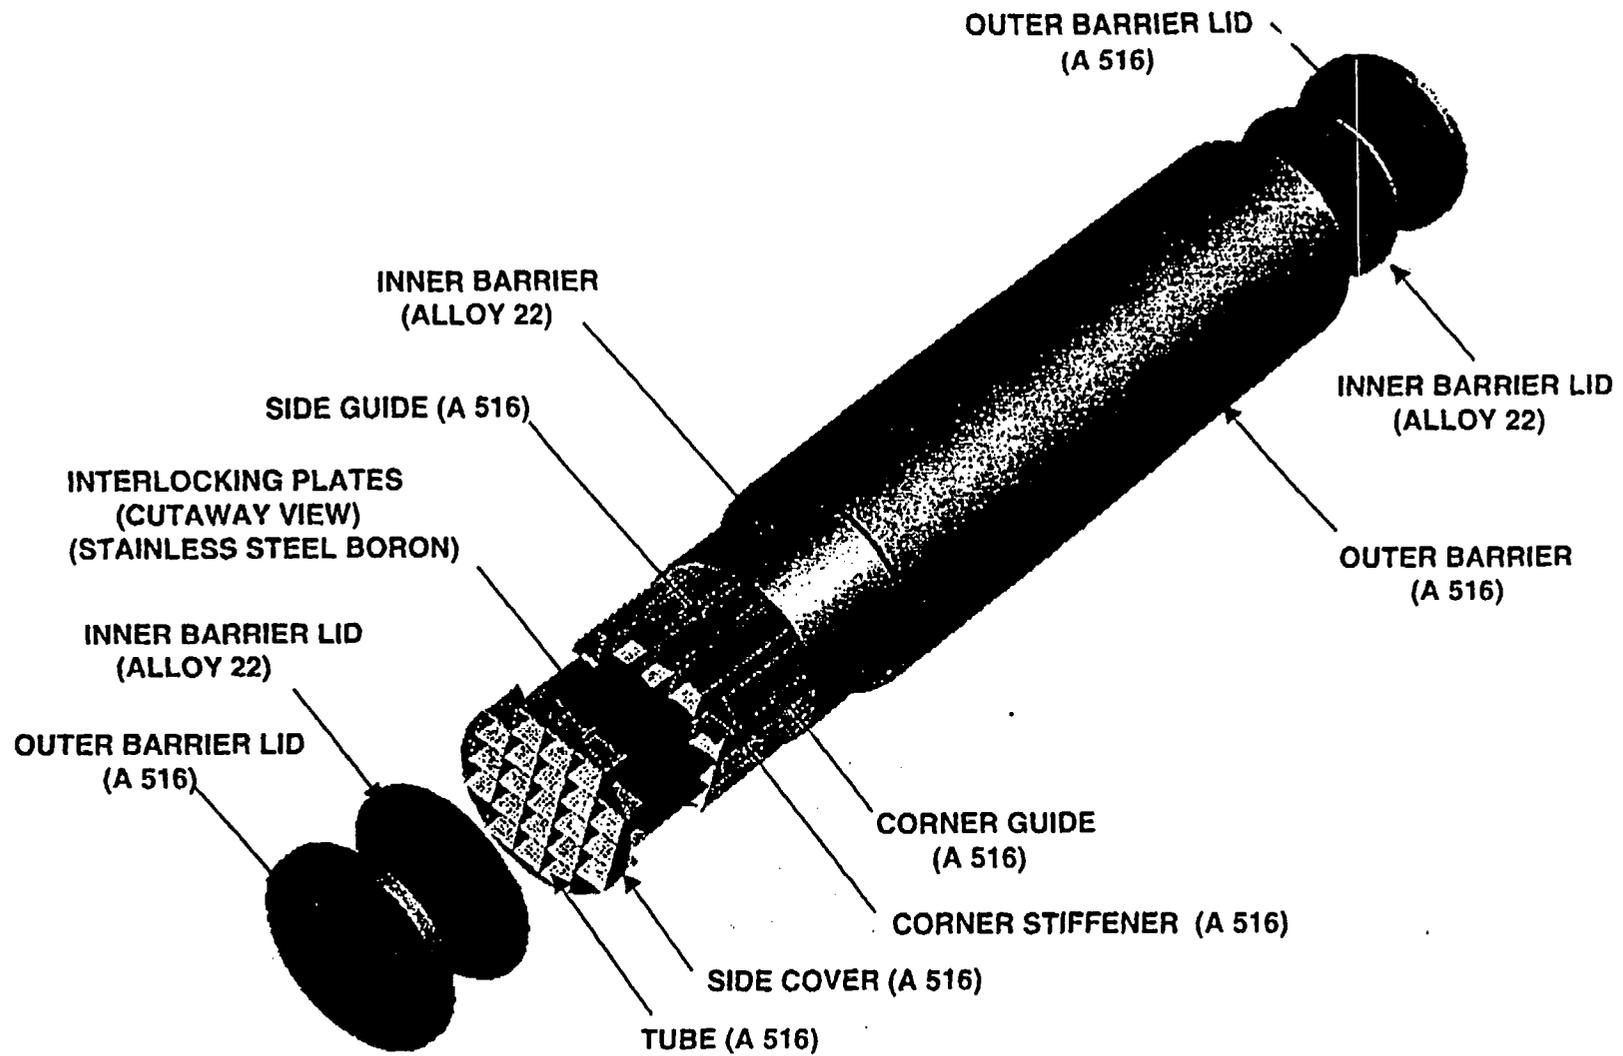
Waste Package for 21 PWR Uncanistered Fuel Assemblies
